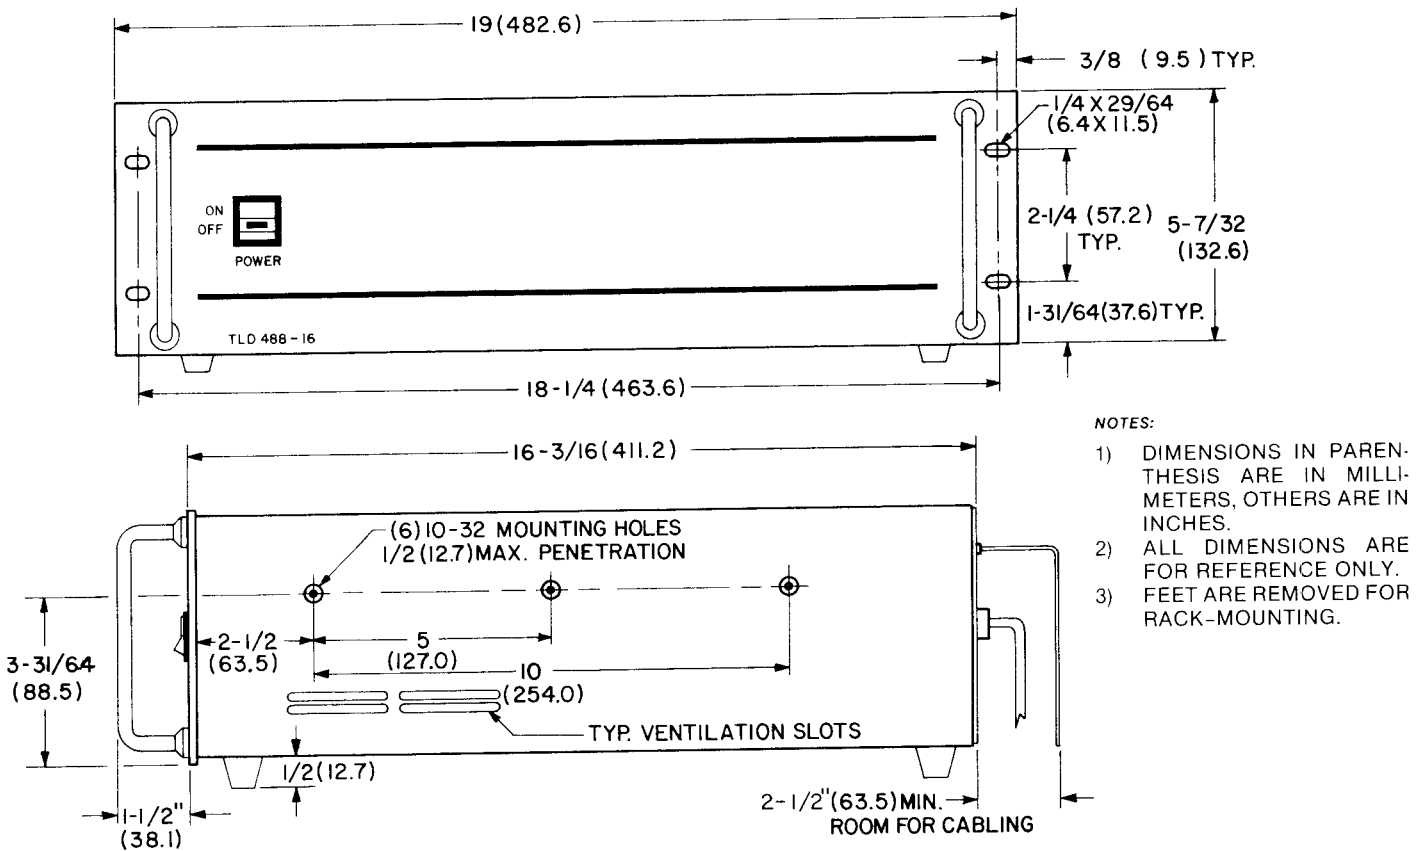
INSTALLATION DRAWING, MODEL TLD 488-16.
